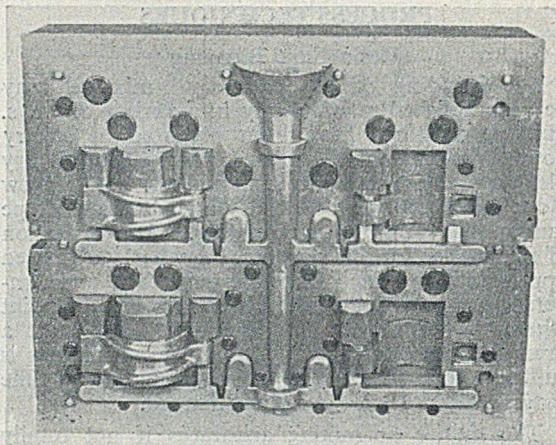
Example of a Gating System for a Typical Ductile-iron Shell Mould.
